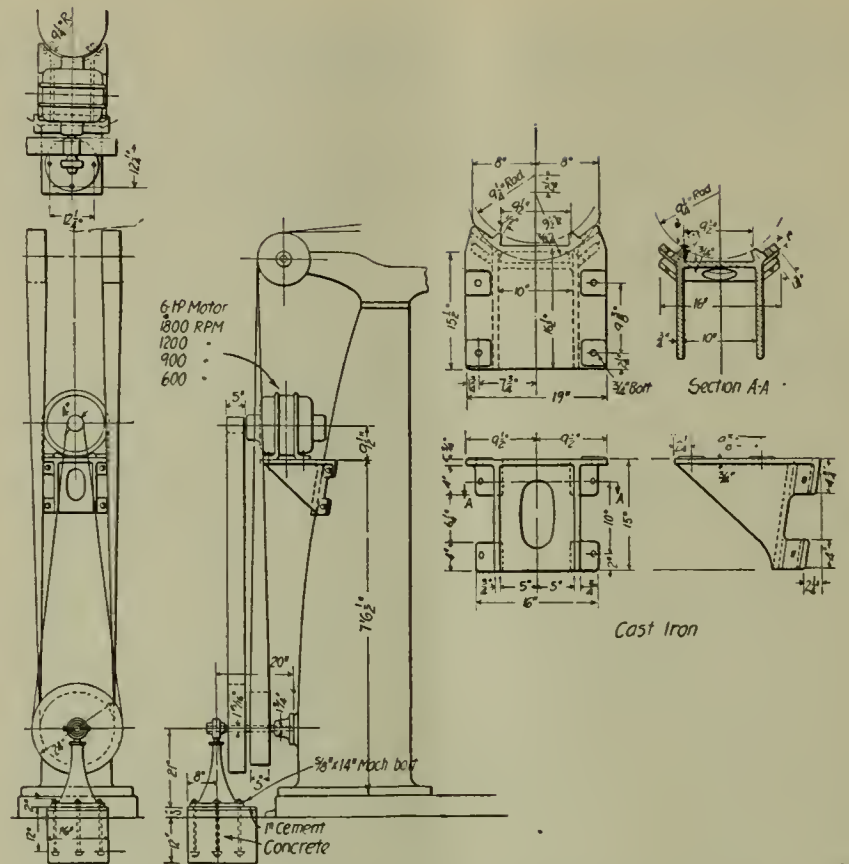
Multi-Speed Motor Applied to Radial Drill Press.
